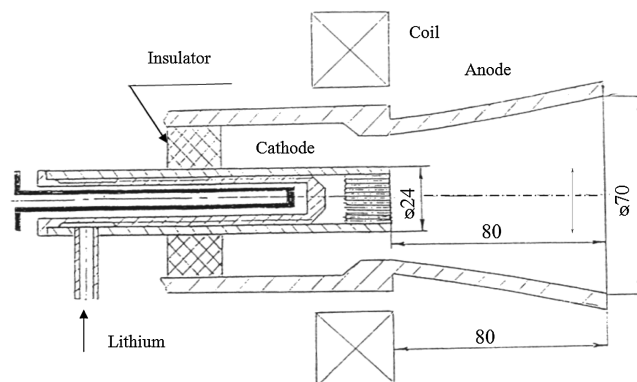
Cross-sectional view of the LiLFA (all dimensions are in millimeters).
